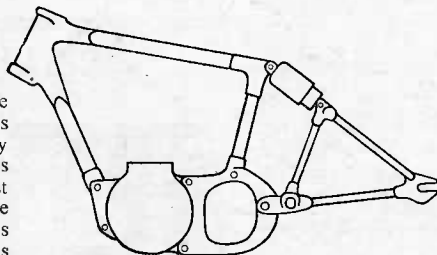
The Bentley and Draper rear springing system, incorporating friction damping. The two pivot bearings were independent (see Fig. 4).
